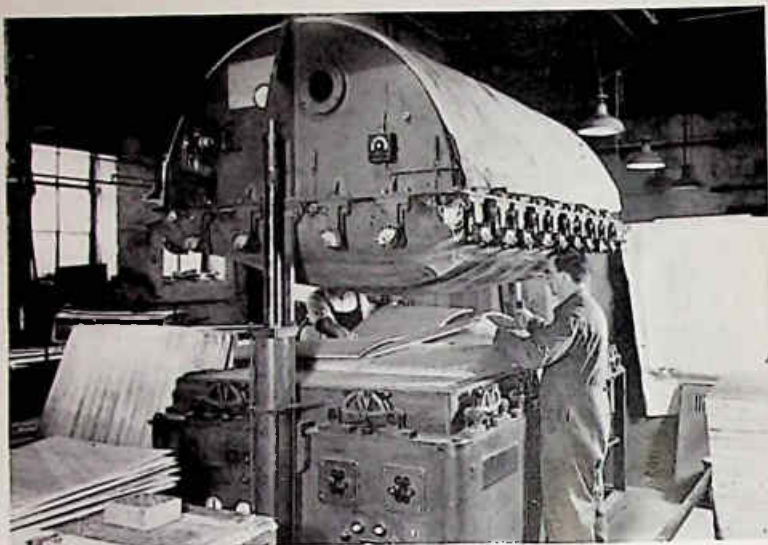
/6. *Panel-shaping machine using vacuum and compressed air, with heat applied to both sides of panel.
